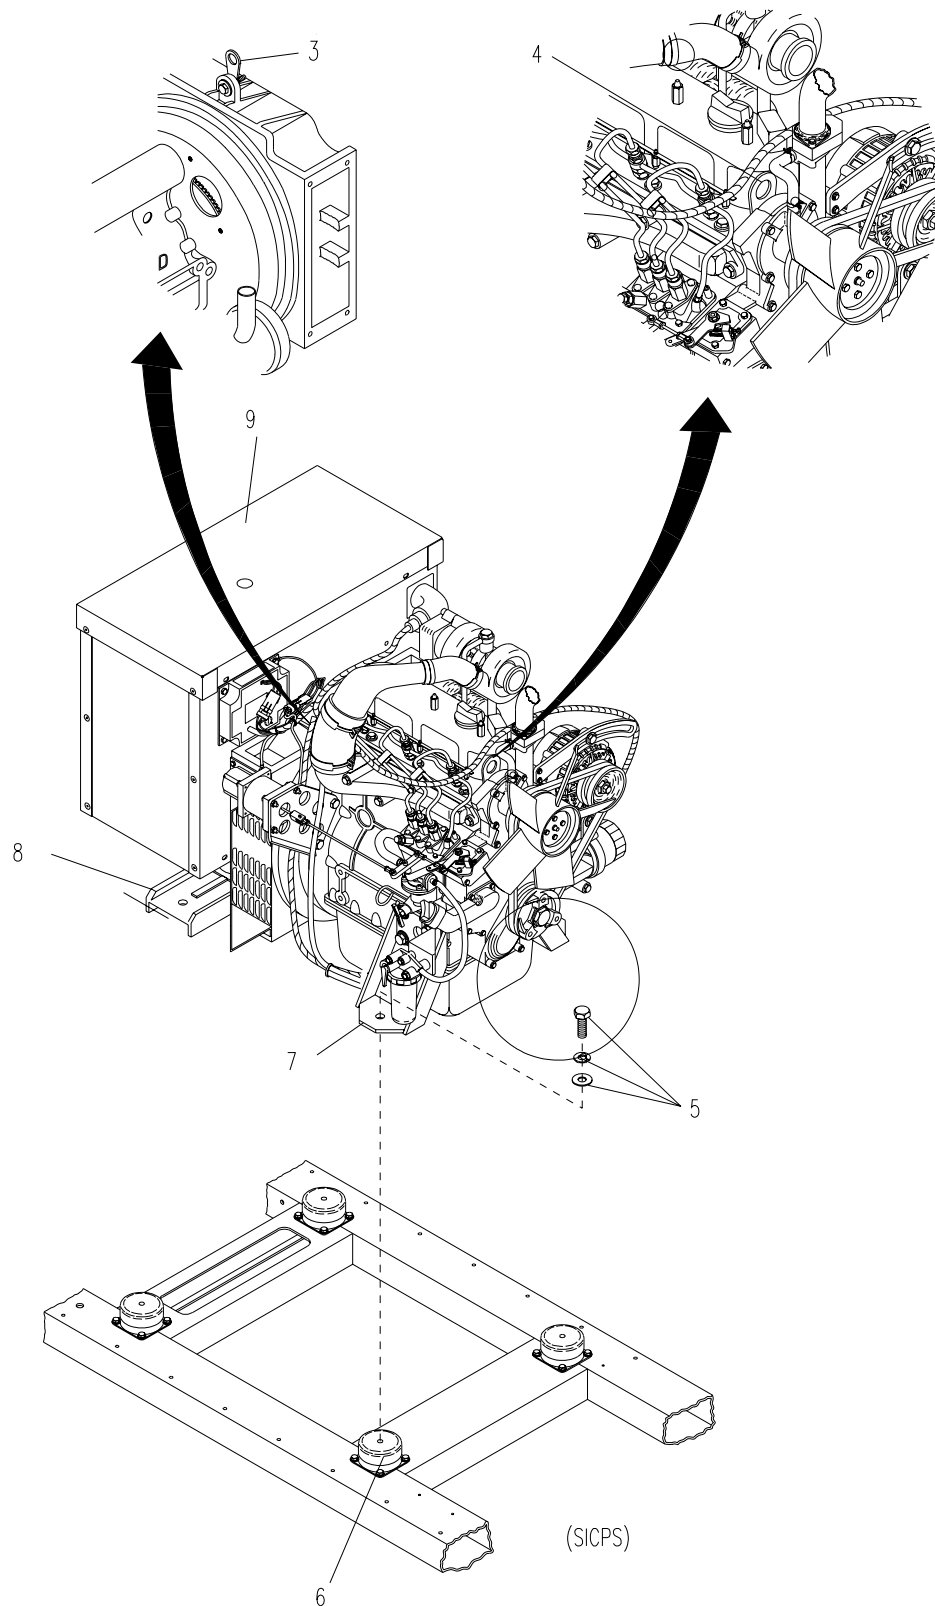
Frame Assembly and Vibration Isolator Mount Assembly (Sheet 2 of 6)
